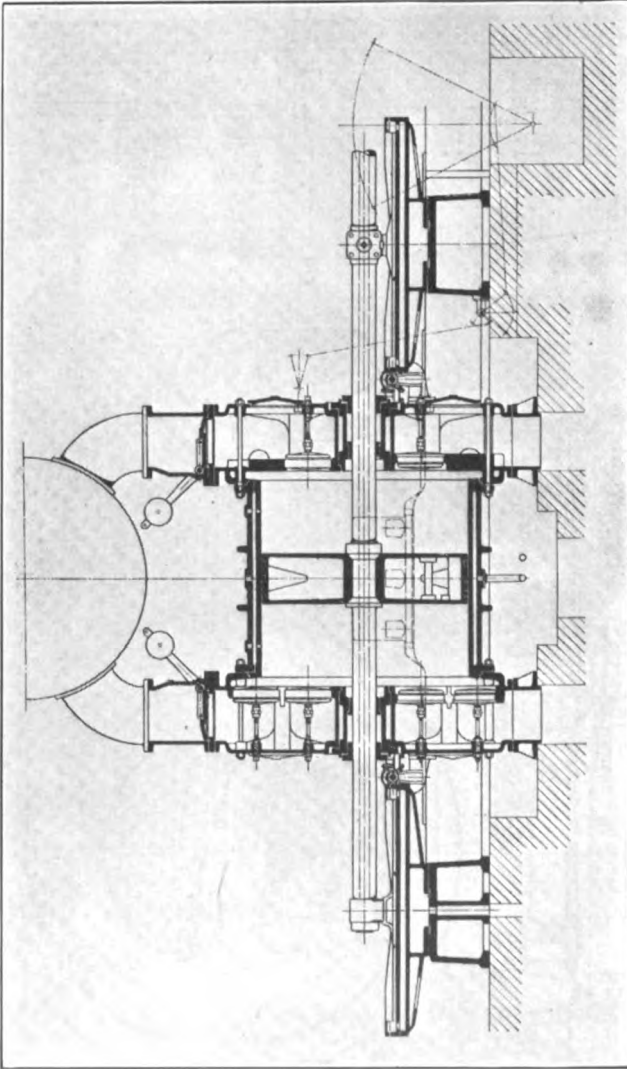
BLOWER WITH MULTI-PORTED PLATE VALVES, SHOWING EXTENDED HEAD
